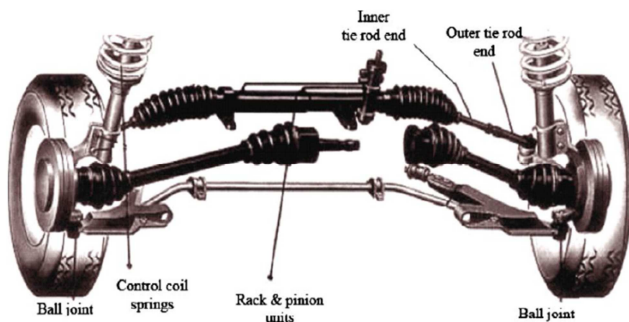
Typical Steering System showing the Inner and Outer end of a Tie Rod [9].
